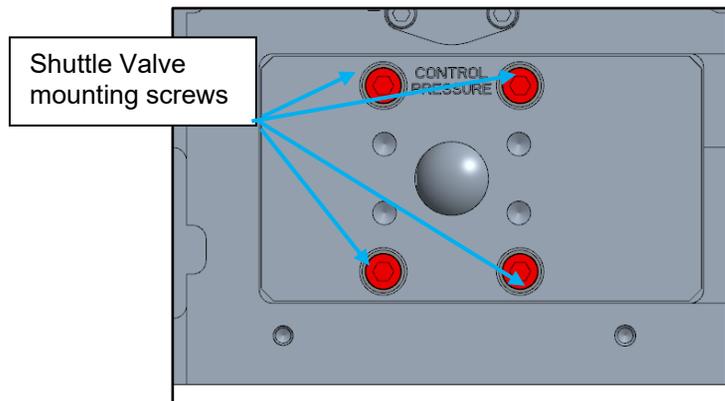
VariStroke Shuttle Valve Retaining Screws
